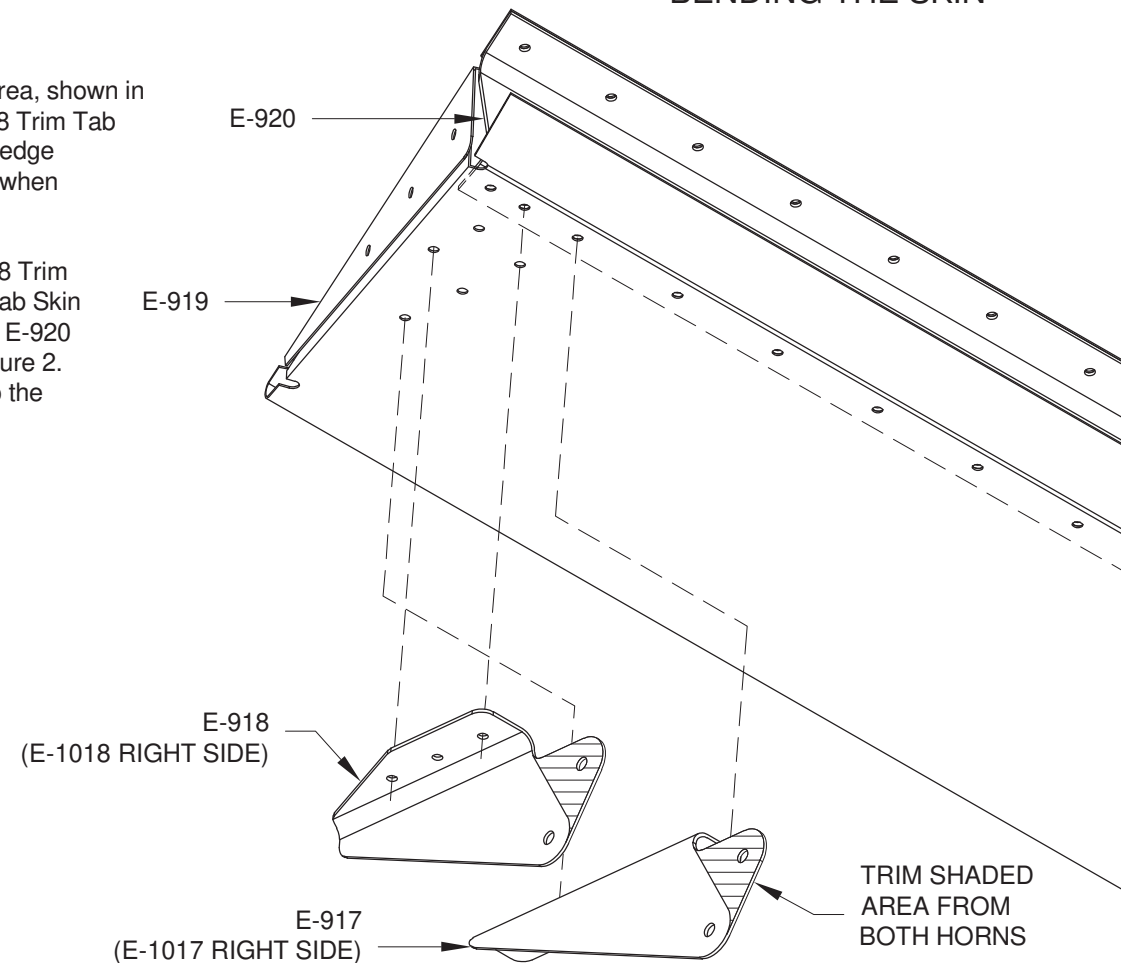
TRIMMING AND DRILLING THE TRIM TAB HORNS
